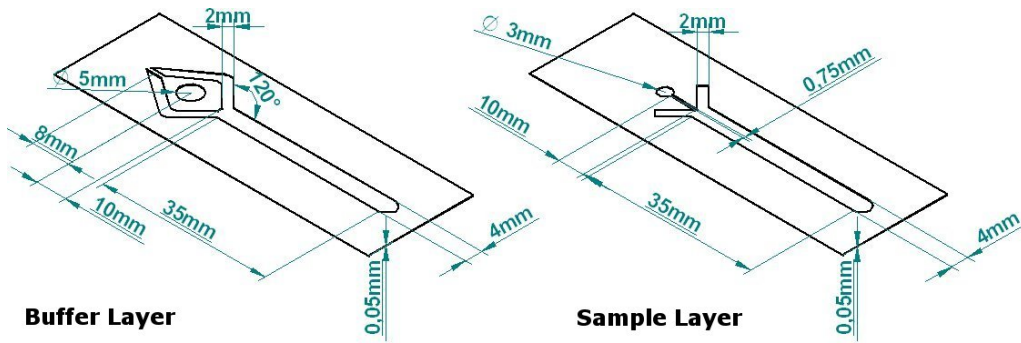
Dimensions of pressure sensitive layers. Buffer layer shown left and Sample layer shown right.
